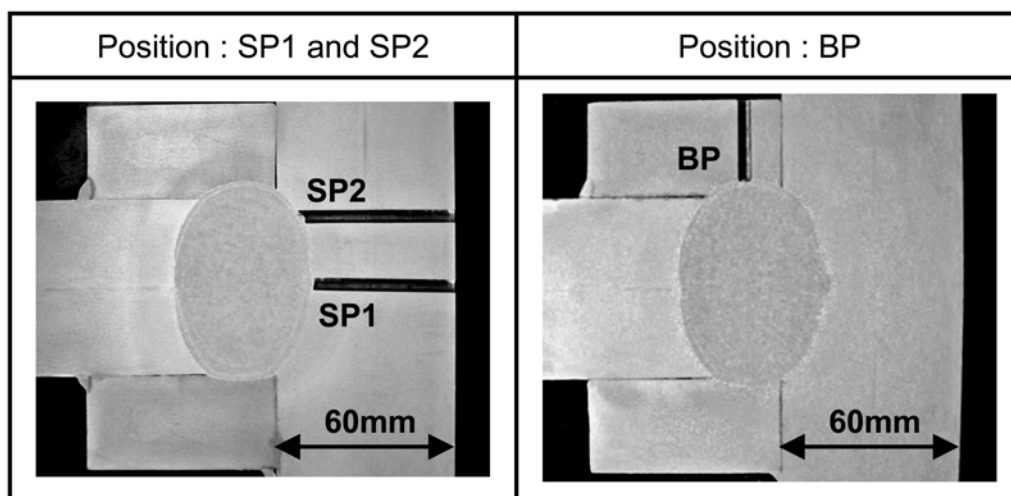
Observation of thermo-couple positions after electroslag welding.
